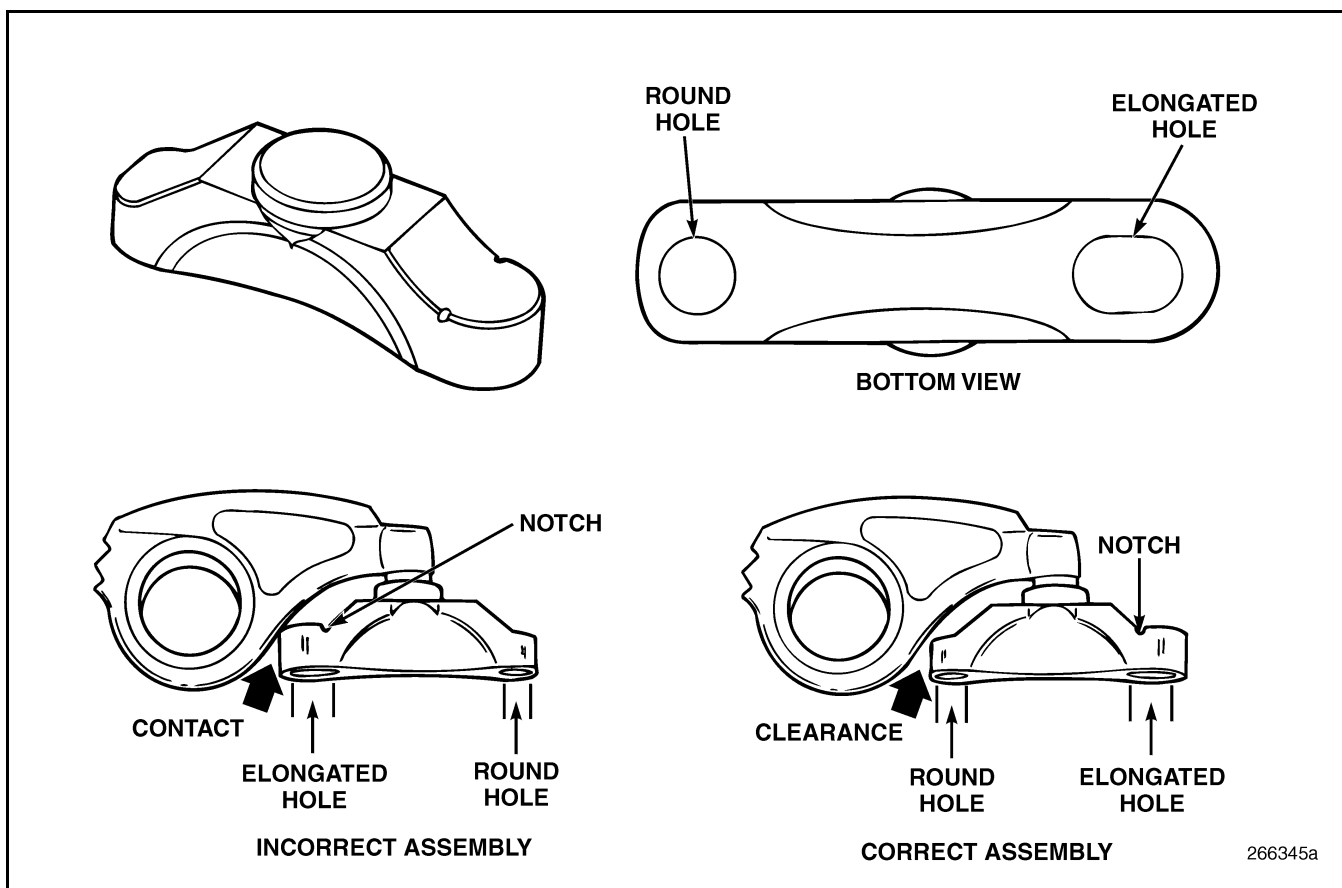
Proper Assembly of the Pinless Valve Yoke
